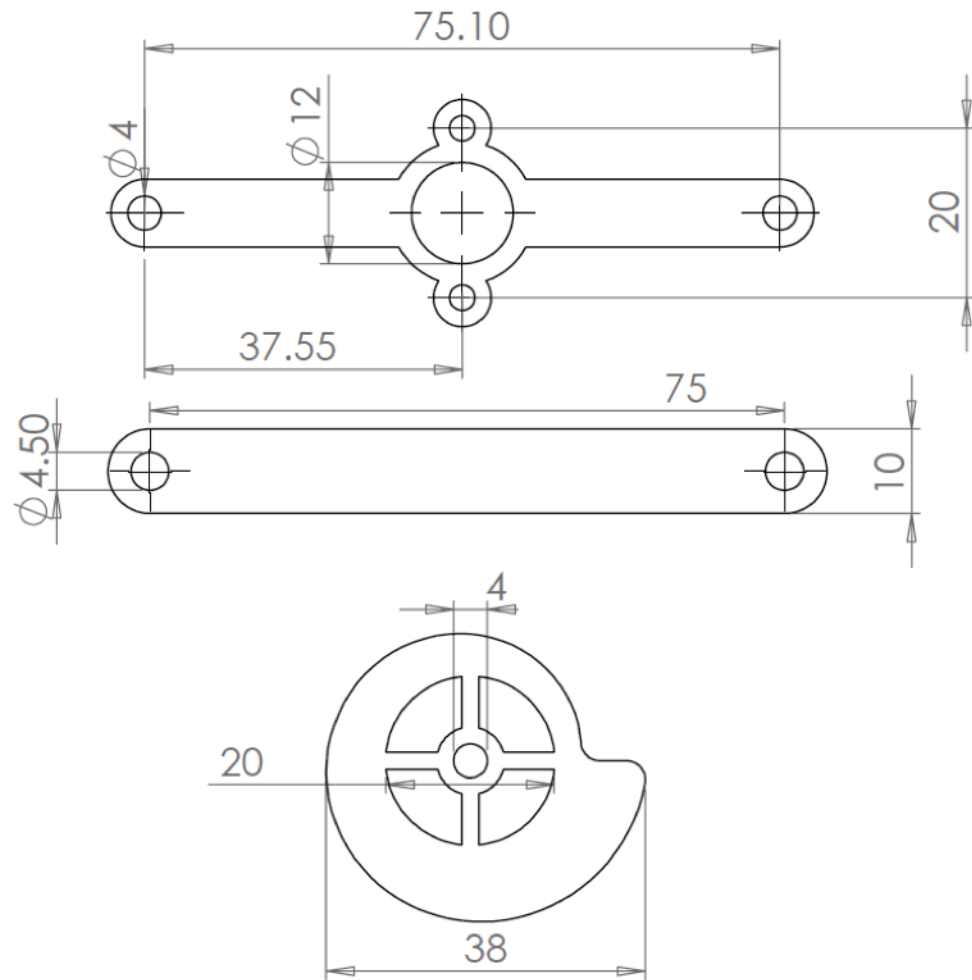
CAD drawing of crank, connecting rod and cam. Dimensions are in millimetres and based on the piston motion, crank torque and inertia predictions of Section 5.3.
